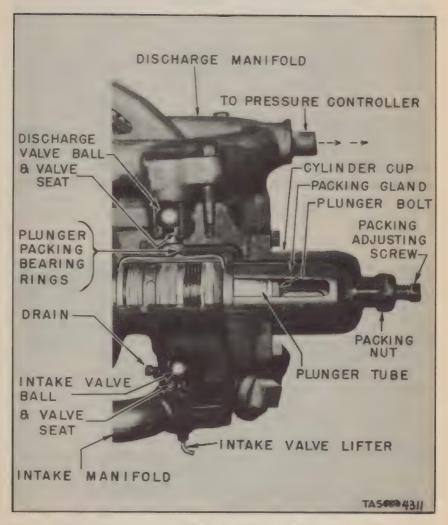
Sectionalized View of Pump Cylinder and Valves.
